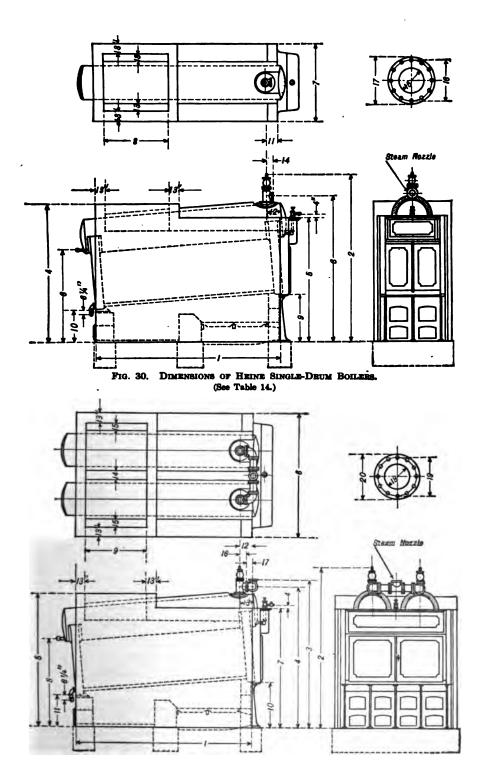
DIMENSIONS OF HEINE DOUBLE-DRUM BOILERS. (See Table 15.)
